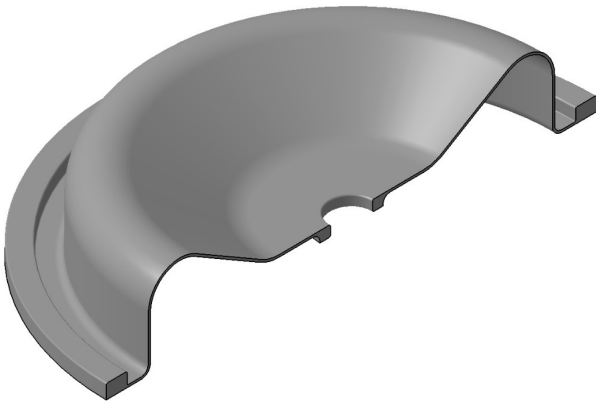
Cross section of diaphragm shape optimized for pneumatic valve (taken from [52])
